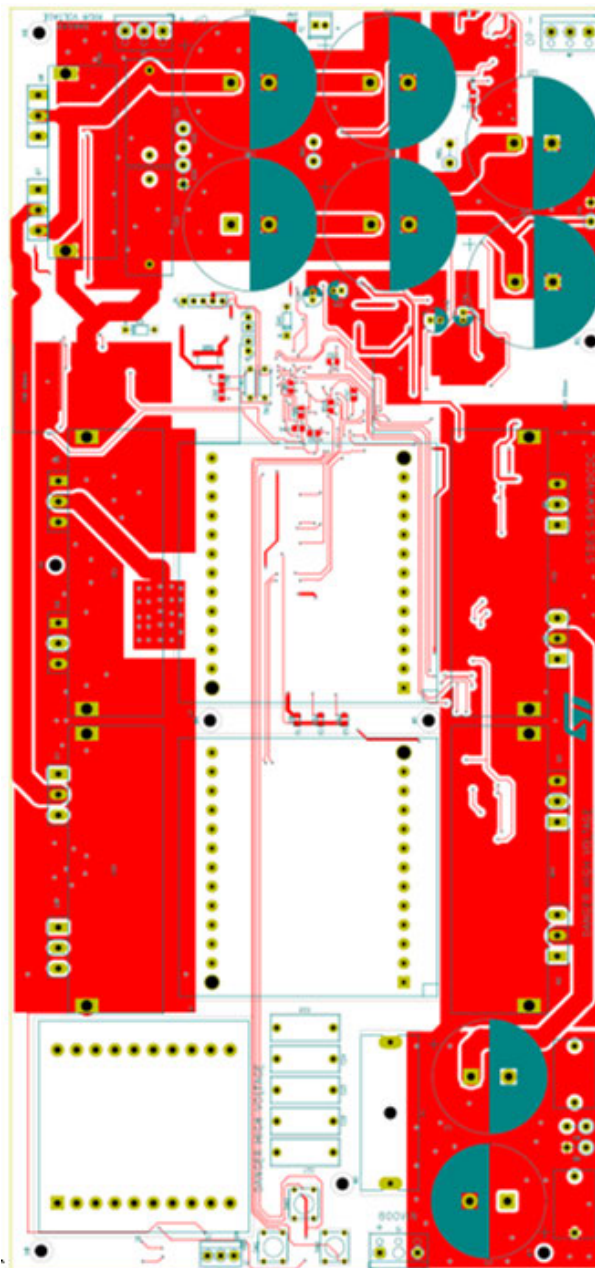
STDES-6KWHVDCDC PCB bottom layer
